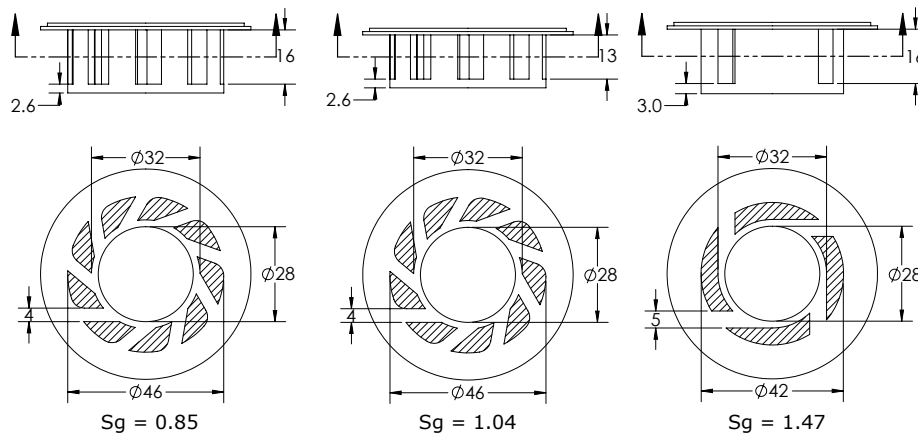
Tangential swirl generators used in the experiments. Geometrical swirl numbers are 0.85, 1.04 and 1.47 respectively. Dimensions in millimetres.
